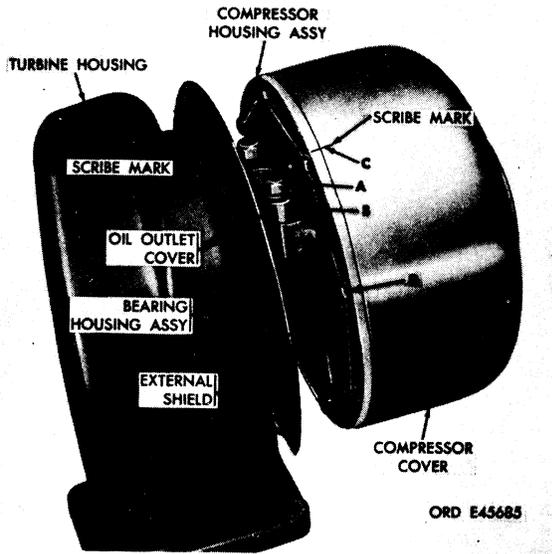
REMOVING OR INSTALLING OIL OUTLET COVER AND COMPRESSOR CAP SCREWS - TURBOCHARGER 7748900.
